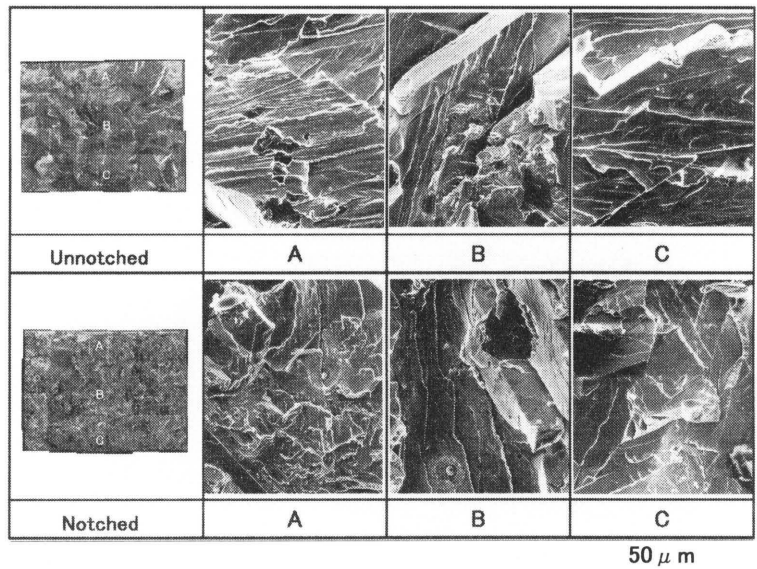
SEM fractography of Si cast steel in brittle fracture region.(173K)
